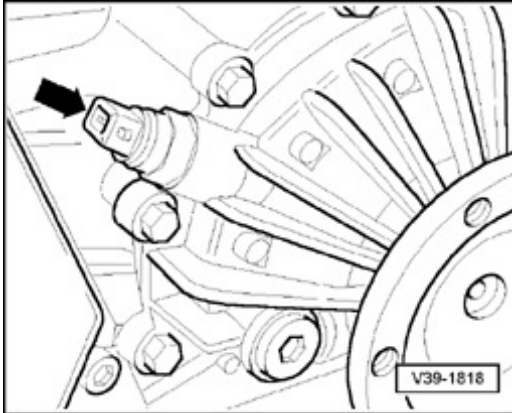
Removing and installing transmission Vehicle Speed Sensor (VSS) -G38-
